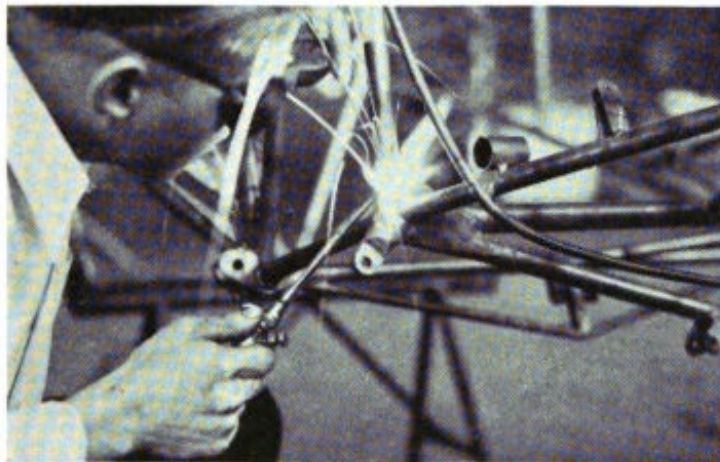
WELDED STEEL-TUBE FUSELAGE
